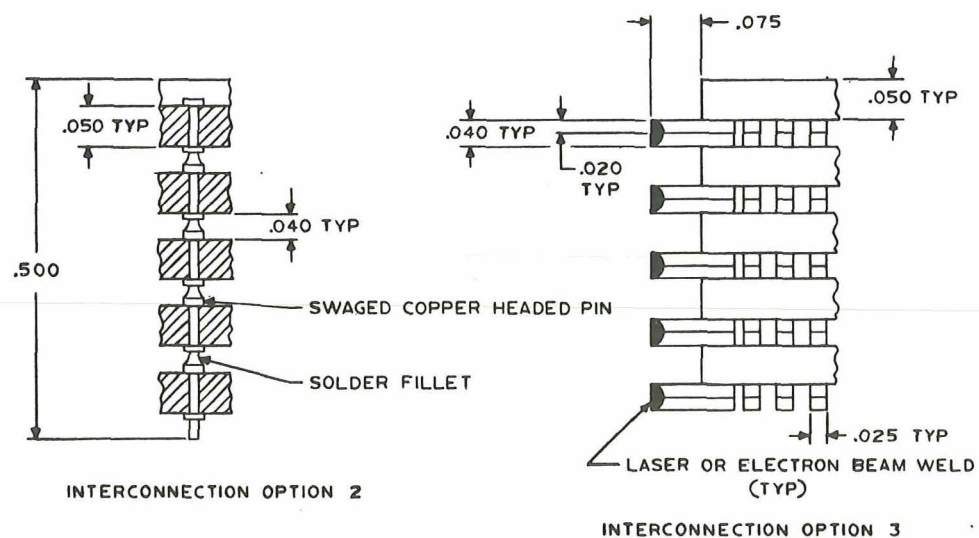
Module formed by stacking and joining five multichip-LSI packages.
